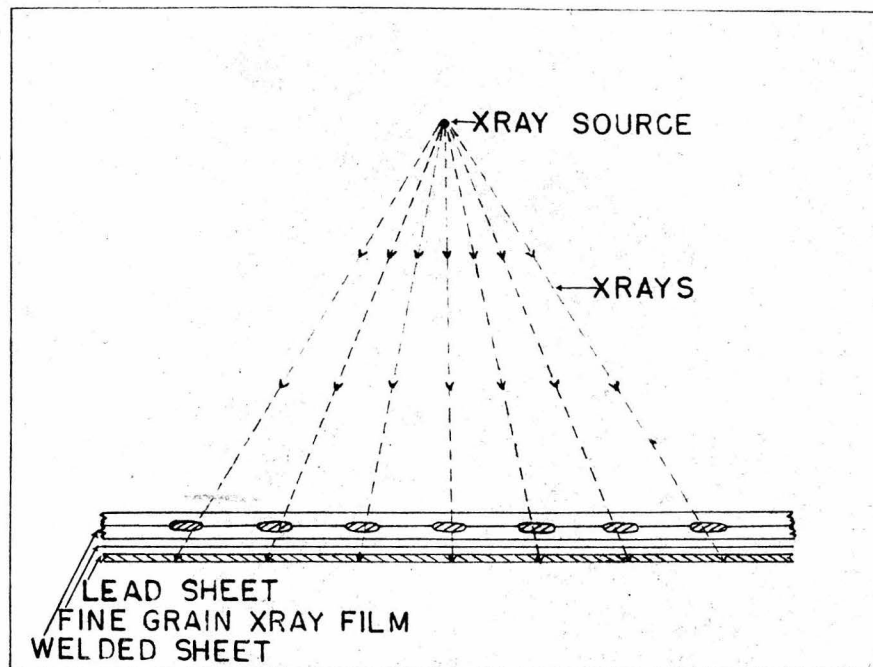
RADIOGRAPHY OF SPOT WELDS.
